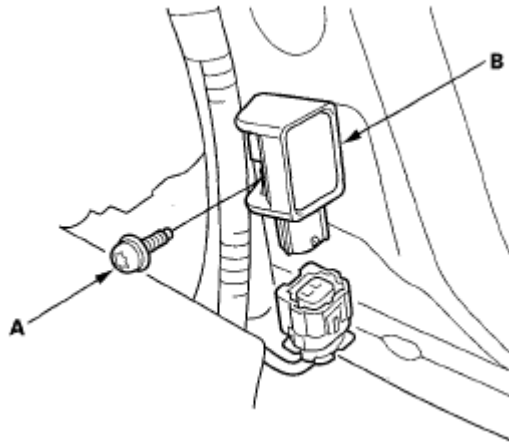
Identifying Fastener And Side Impact Sensor (First)
